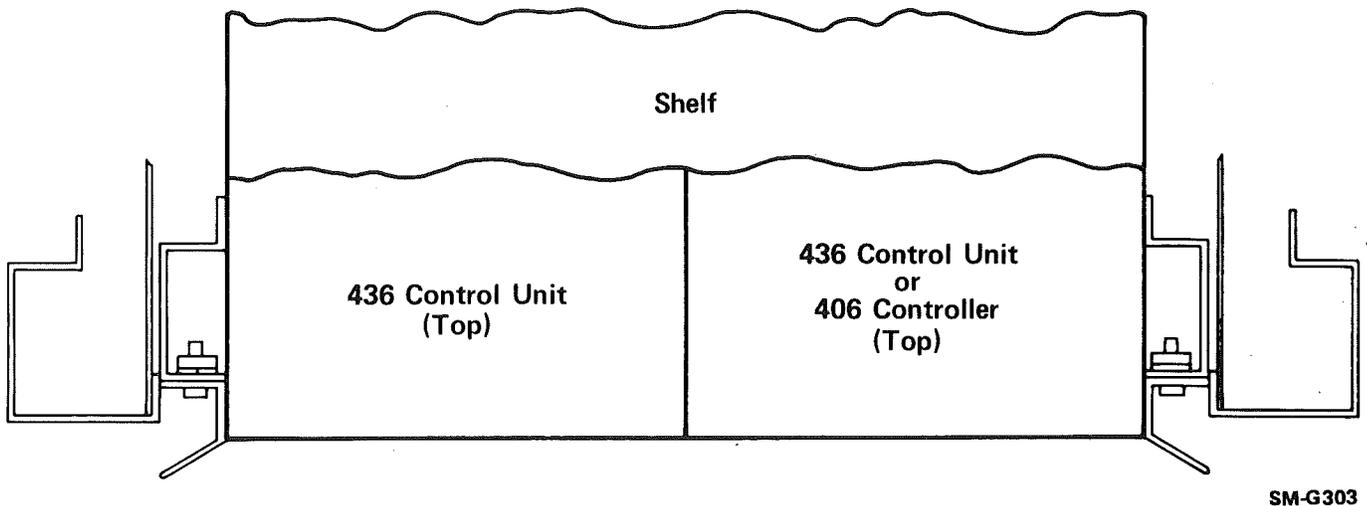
Double Control Unit or Control Unit and Controller Mounting Using EIA Spaced Holes
